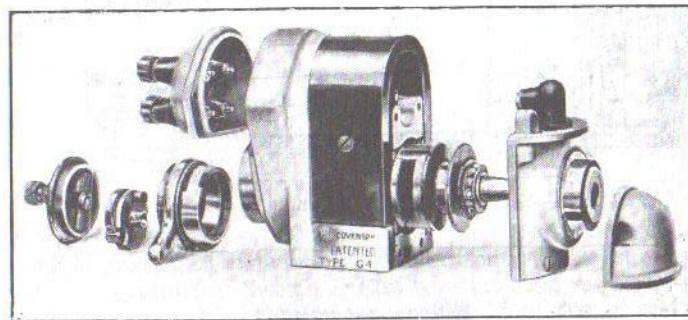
Parts of an M-L Standard 4-Cylinder Magneto.
